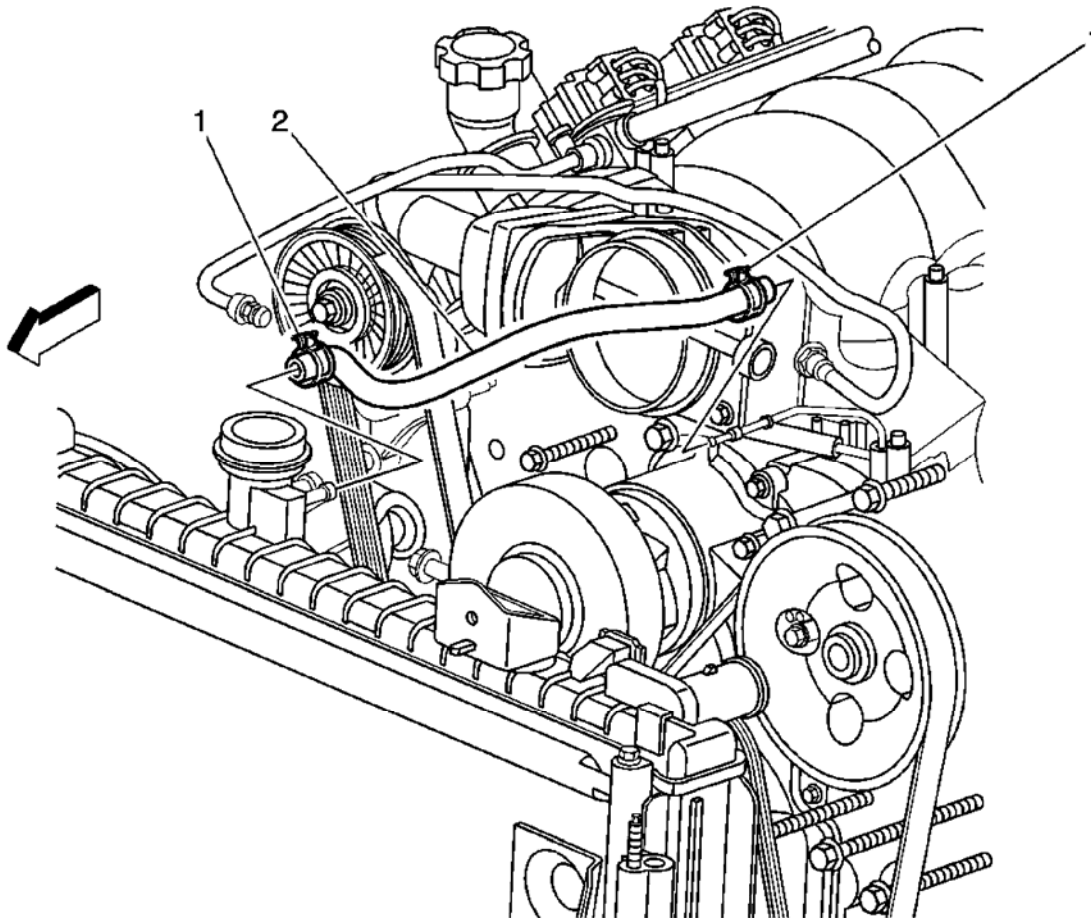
Engine Coolant Air Bleed Hose (LS3, L99)
